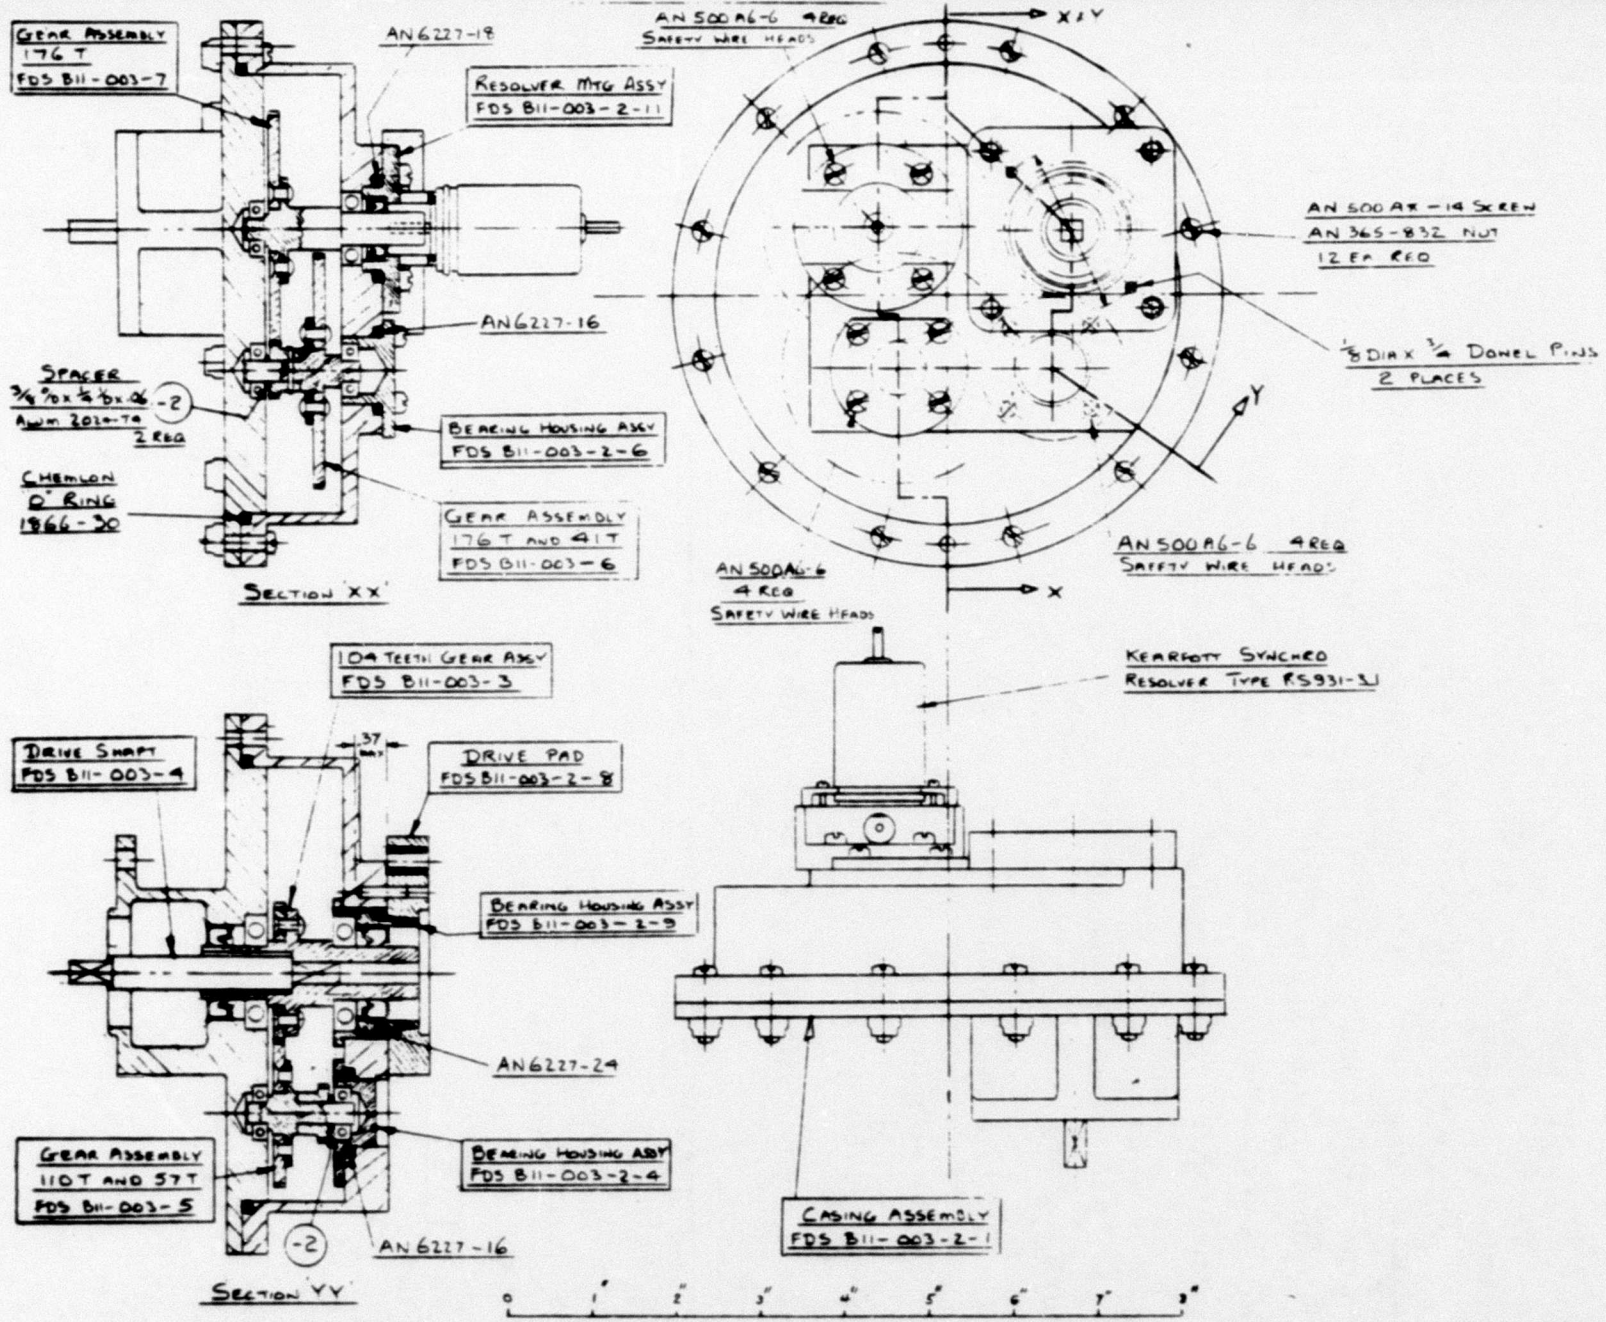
ASSEMBLY DRAWING OF THE GEARBOX
